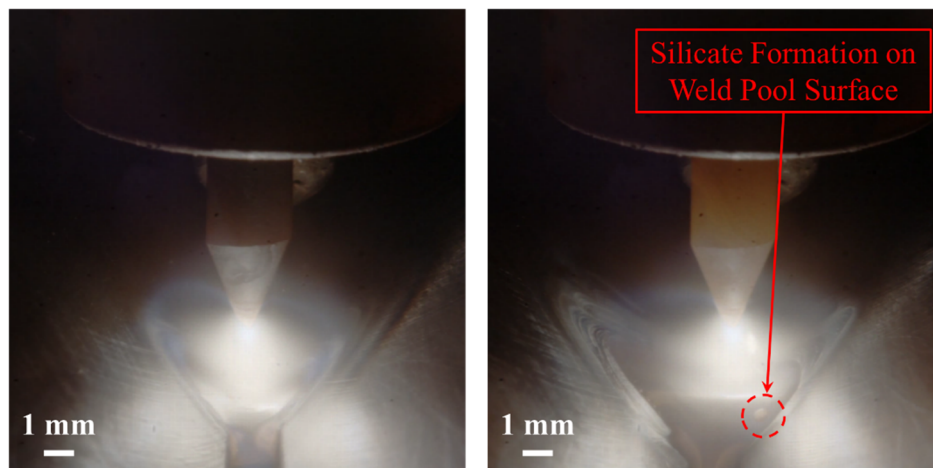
Still images taken from XIRIS weld camera showing completely molten weld pool and the formation of silicates on the weld pool surface.
